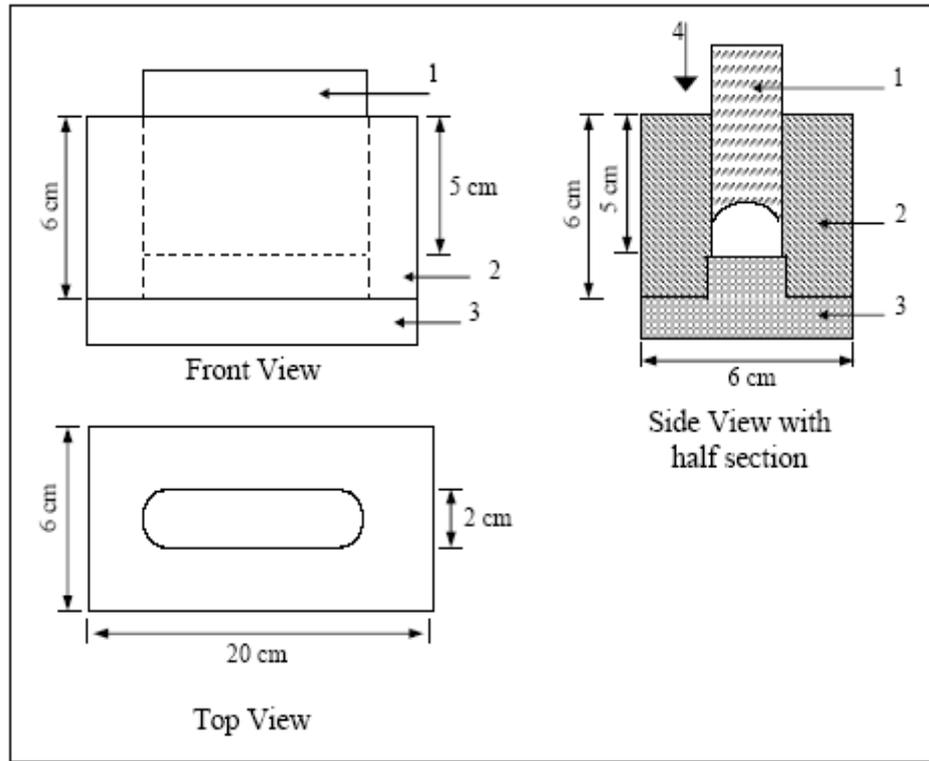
The mold components, (1) moving punch, (2) die (3) base of the mold
